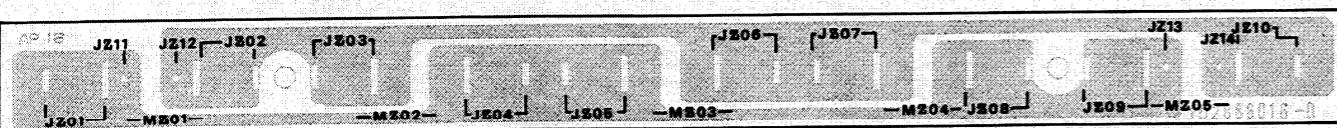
Dial Lamp Assembly PZ01 Component Locations
